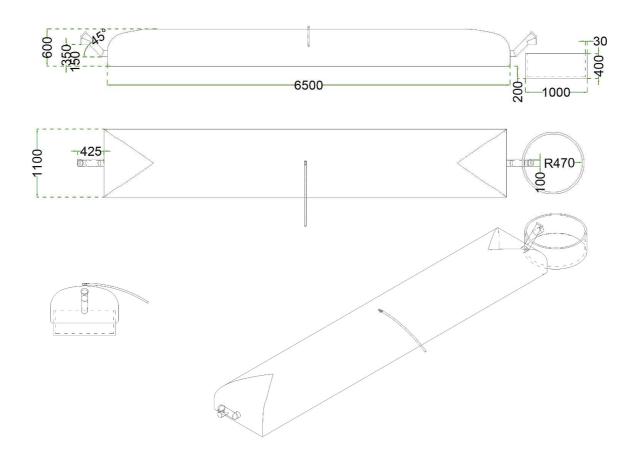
Technical drawing digester 3.7 $\ensuremath{m^3}$
